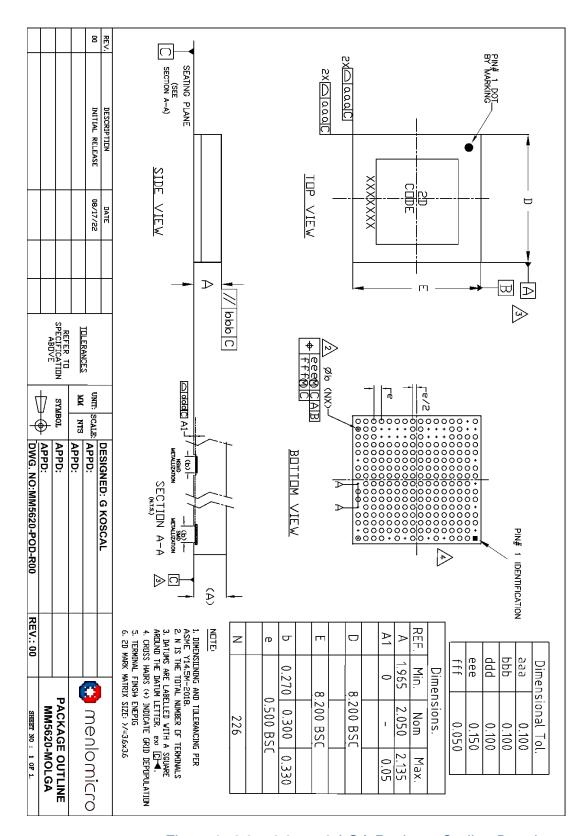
8.2 x 8.2 mm2 LGA Package Outline Drawing
